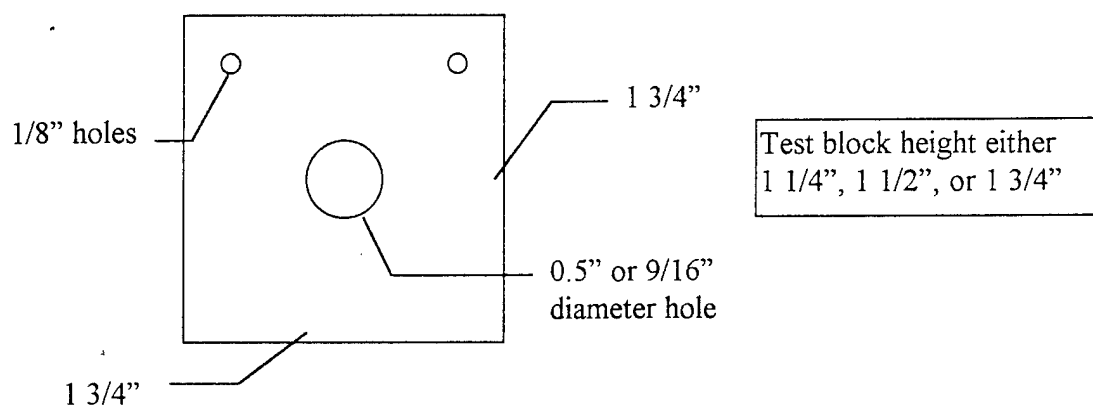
Schematic of a Representative Test Block Showing Dimensions.
